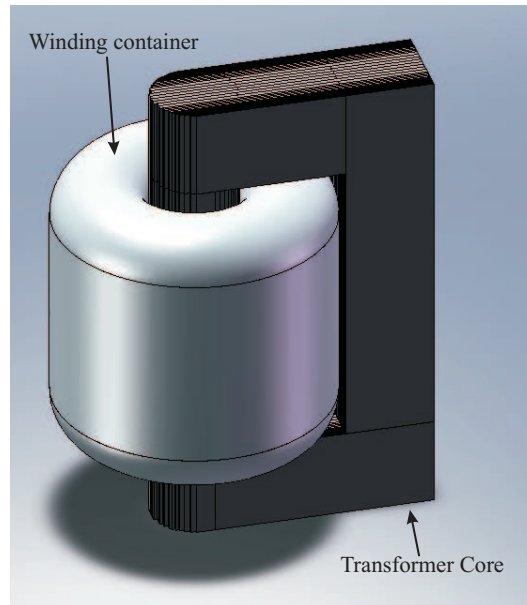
Full core transformer, with toroid shape top and bottom winding container
